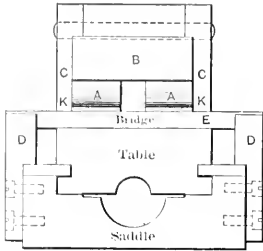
The Principle of the "Bridge Milling" Fixture.
